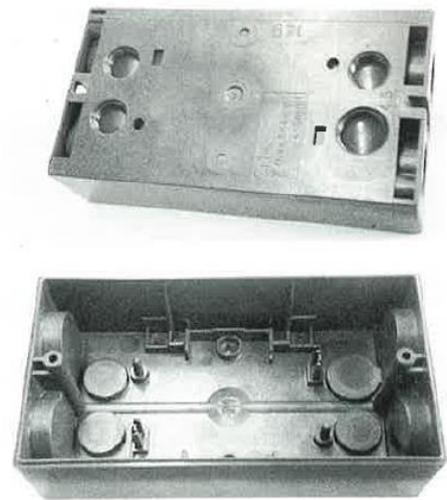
PC housing base (ex. from “Gastrow – Injection Molds – 2nd ed. – 108 proven design – p.164)
